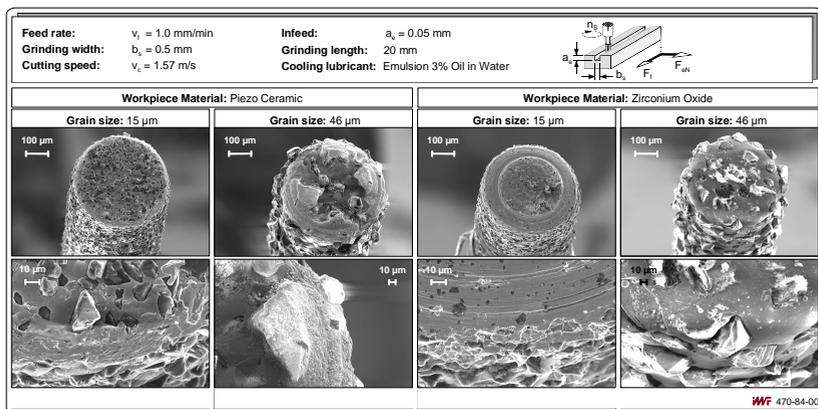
Tool wear after grinding ceramics with different diamond grinding pins
